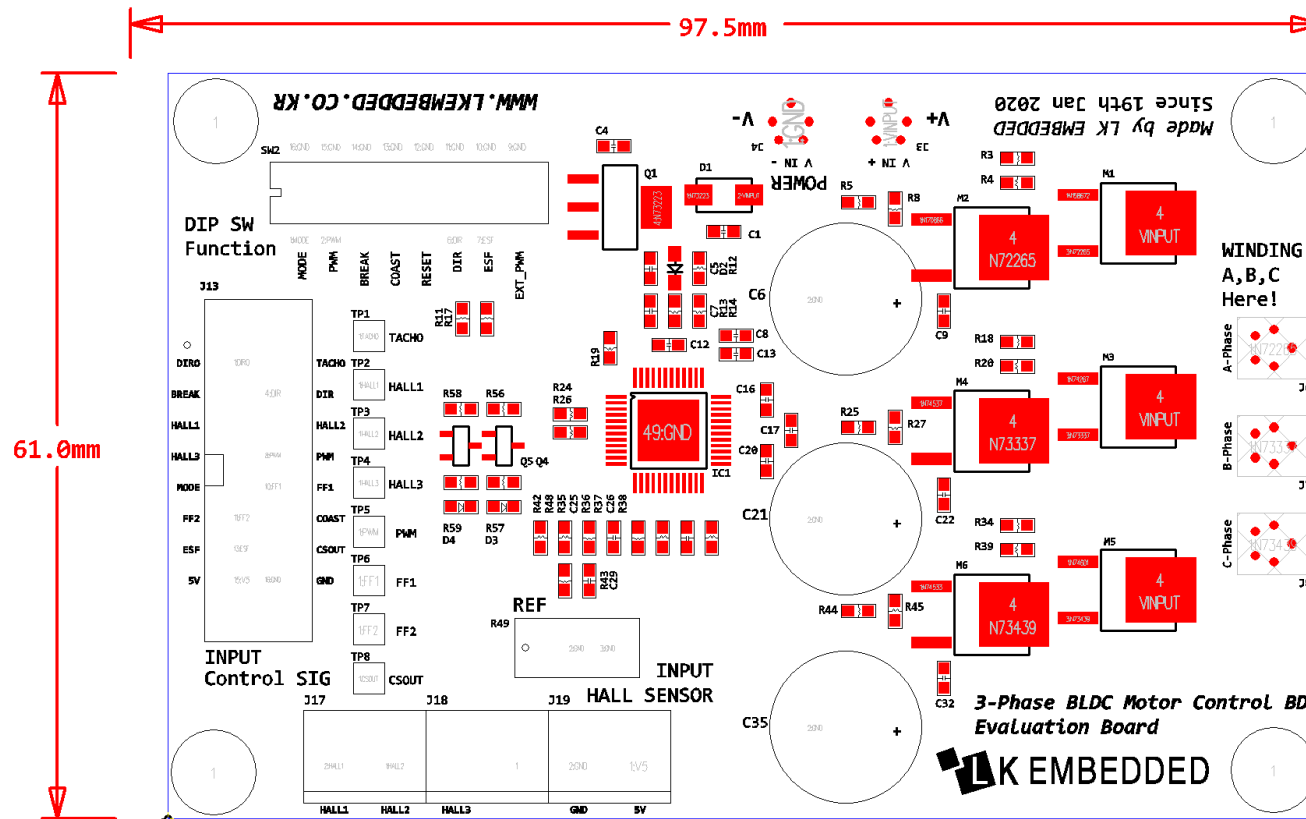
PCB Dimension of 3 Phase BLDC Motor Controller
